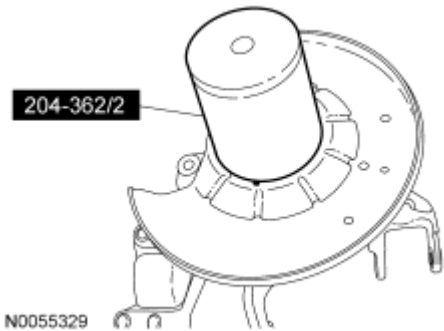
Aligning Index Marks & Installing Brake Disc Shield Onto Wheel Knuckle Using Special Tool (204-362/2)
